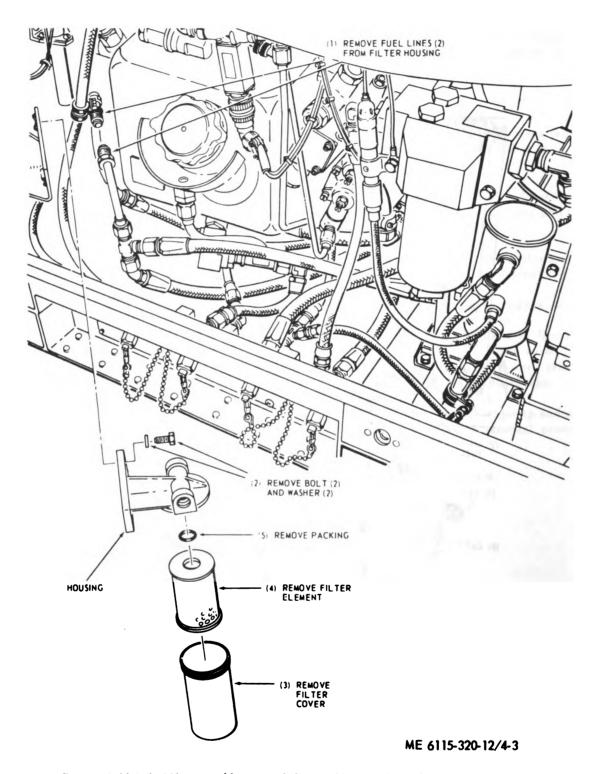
Main fuel filter assembly, removal, disassembly, assembly and installation.
